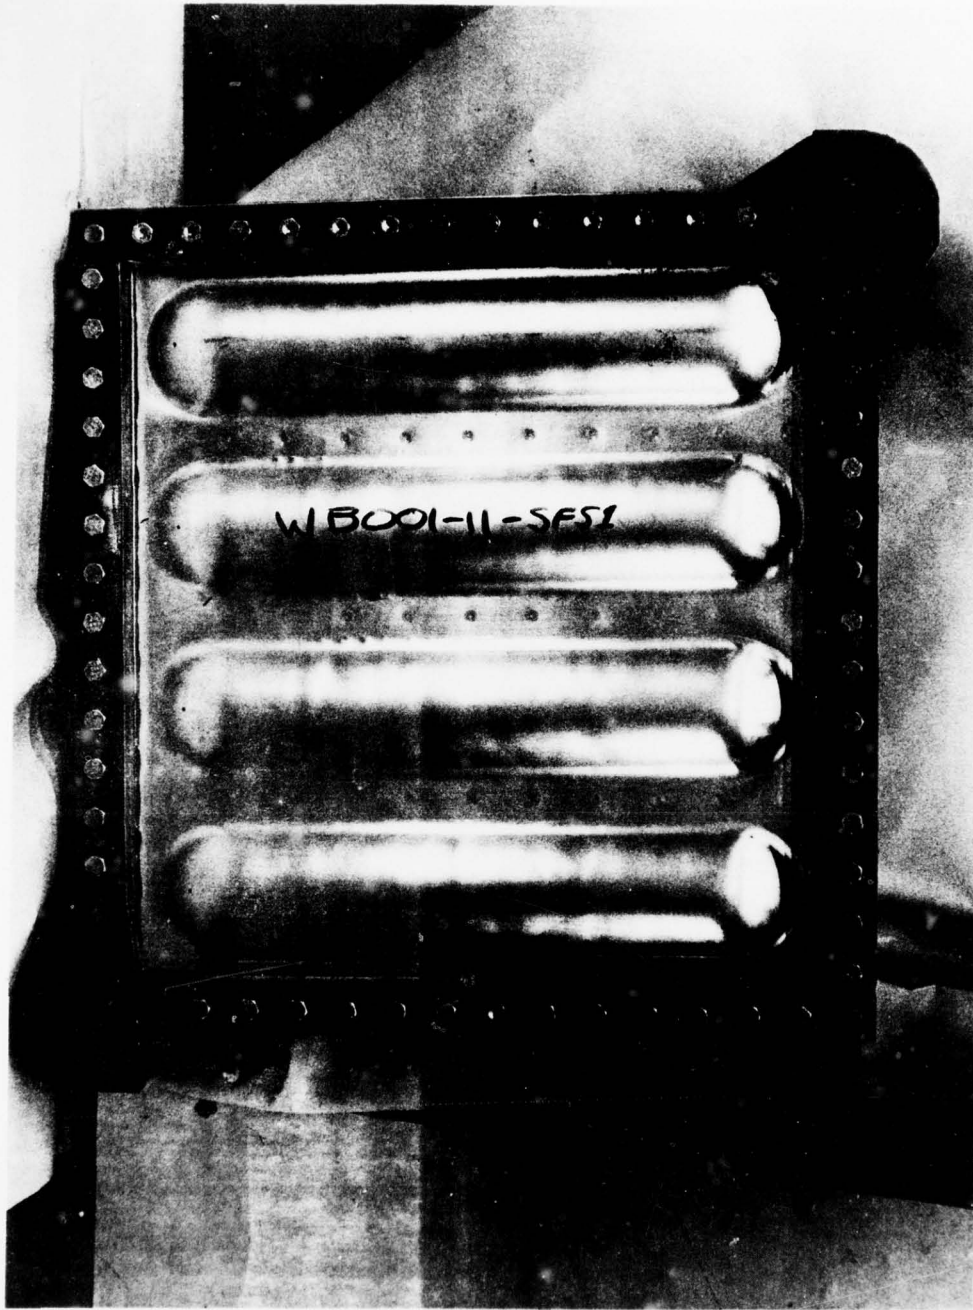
SHEAR PANEL LOADING FIXTURE
